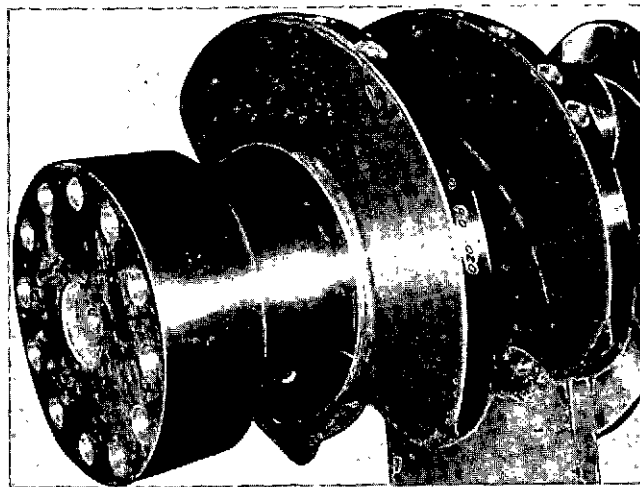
, V40182. Oversize thrust bearing size mark on crankshaft
